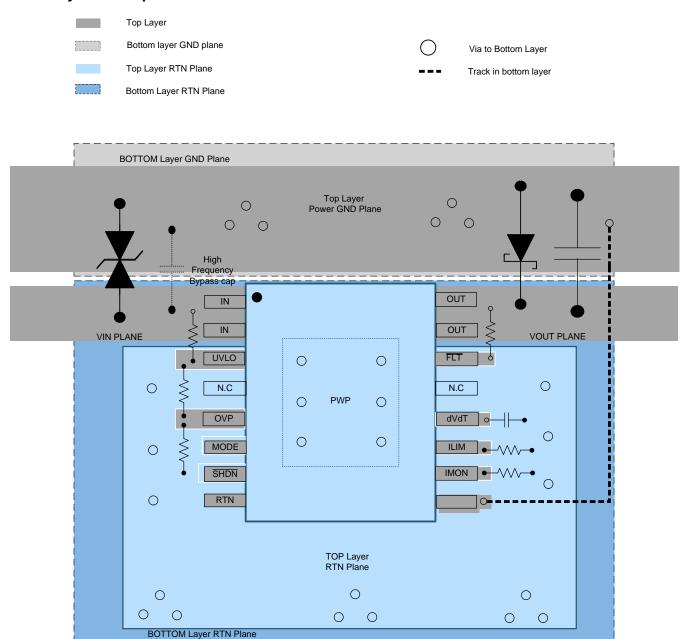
Typical PCB Layout Example with HTSSOP Package with a 2 Layer PCB
